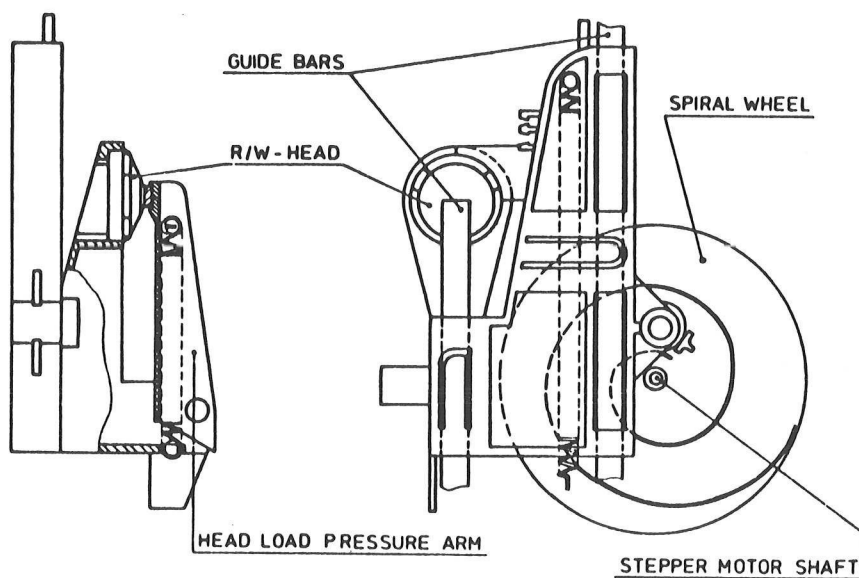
2 : POSITIONING MECHANISM BASF 6106
